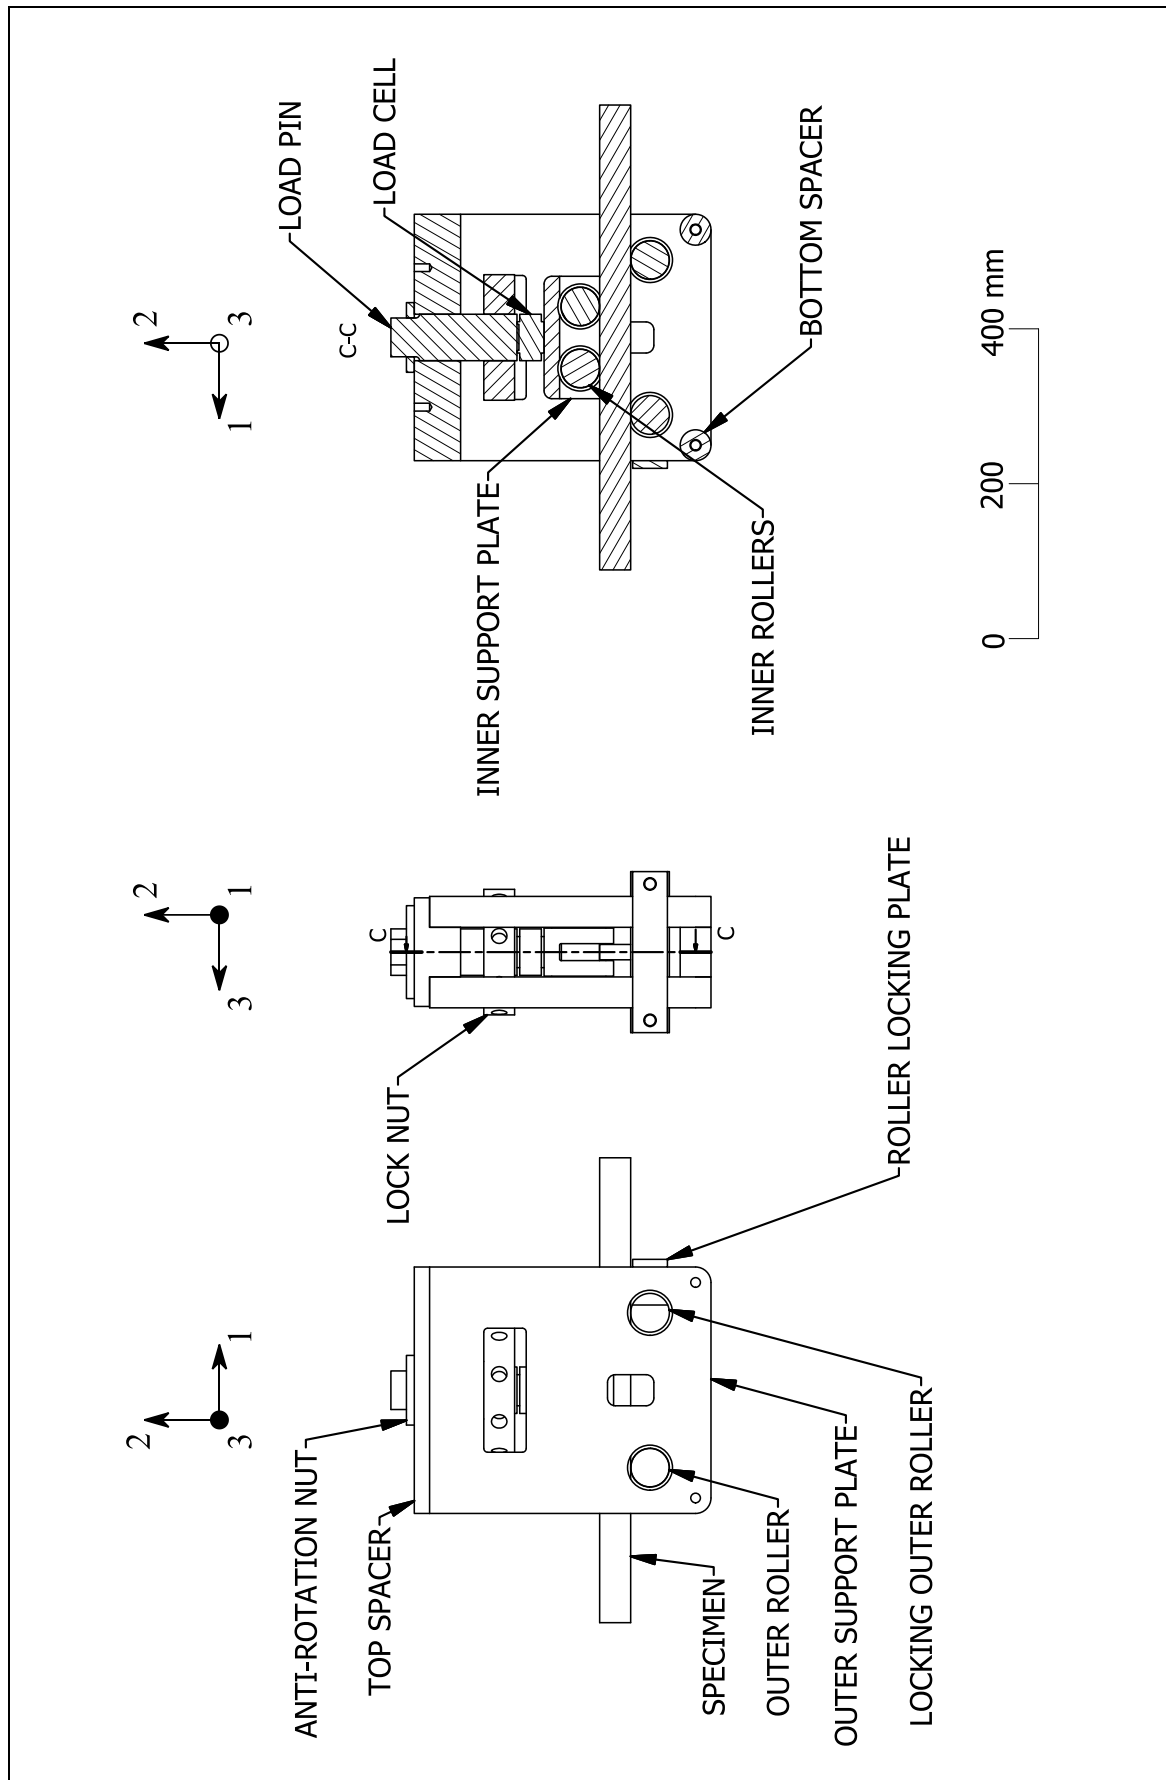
Assembly drawing of the fixed-displacement four-point bending fixture.
